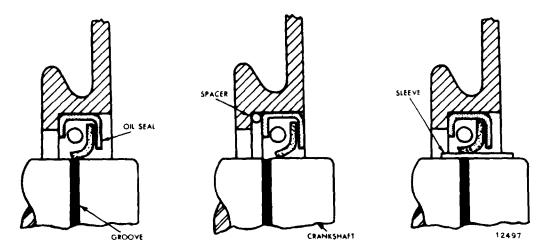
B-83. Use of Rear Oil Seal Spacer or Sleeve on Grooved Crankshaft
